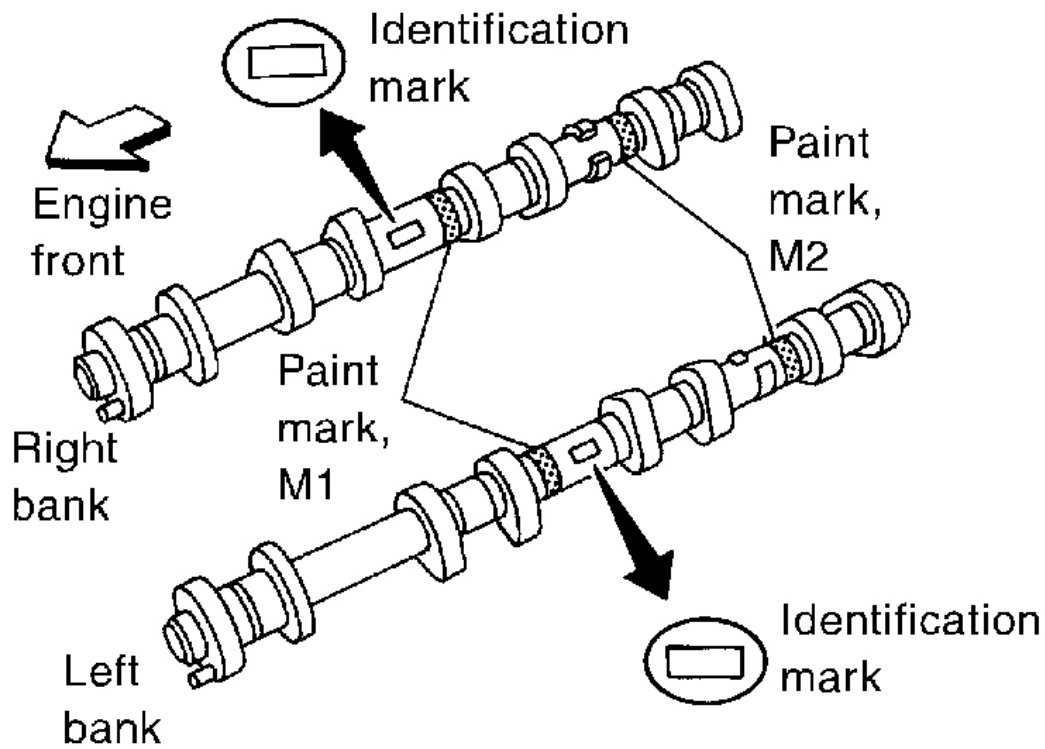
Installing Exhaust And Intake Camshafts And Camshaft Brackets
